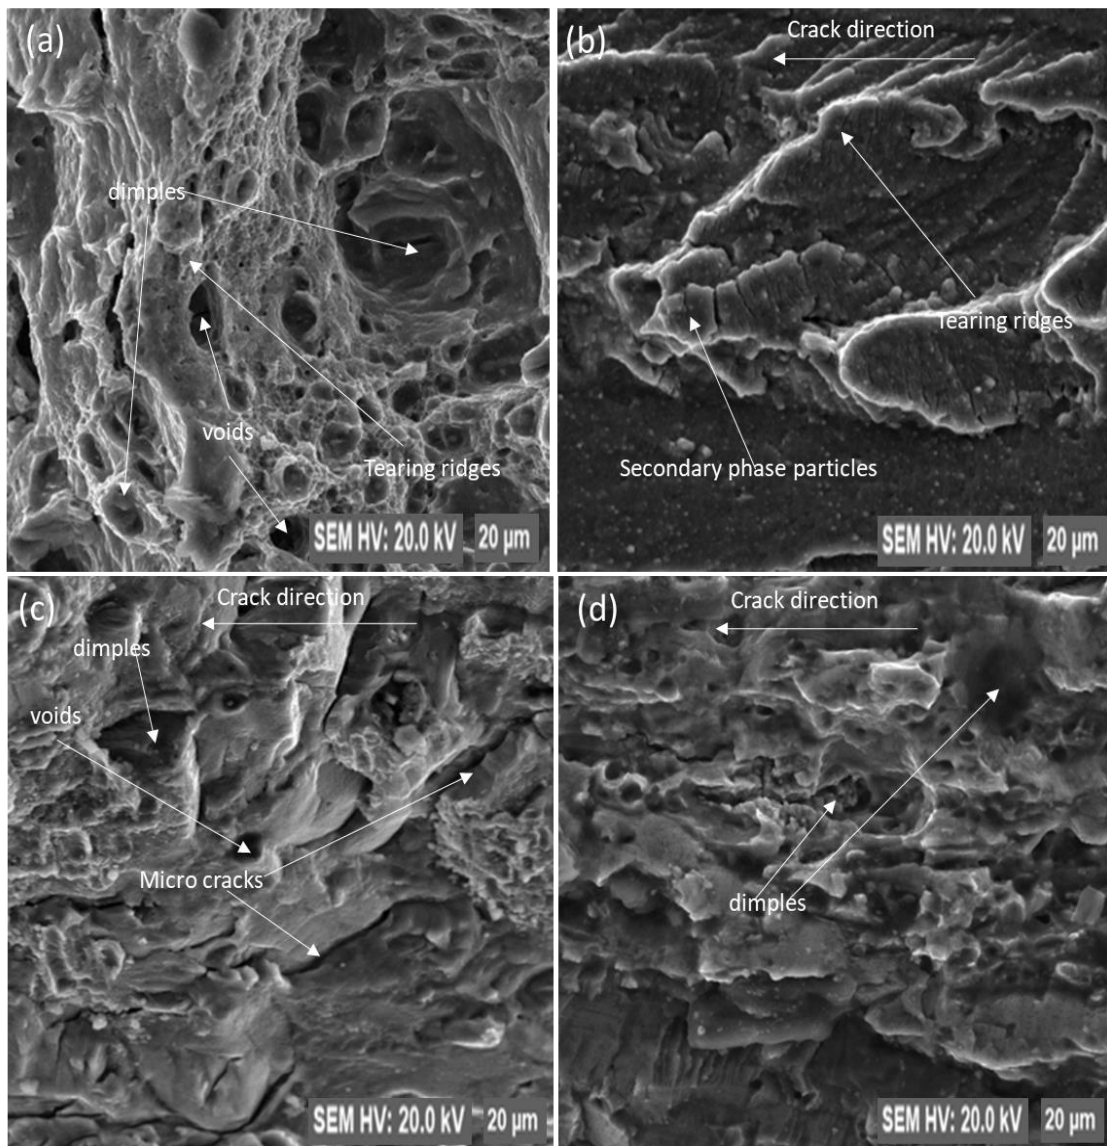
Fatigue crack initiation morphology of (a) Al alloy 7075-O countersunk rivet hole, (b) Al alloy 7075-O perpendicular rivet hole, (c) Al alloy 7075-T6 countersunk rivet hole, (d) Al alloy 7075-T6 perpendicular rivet hole.
